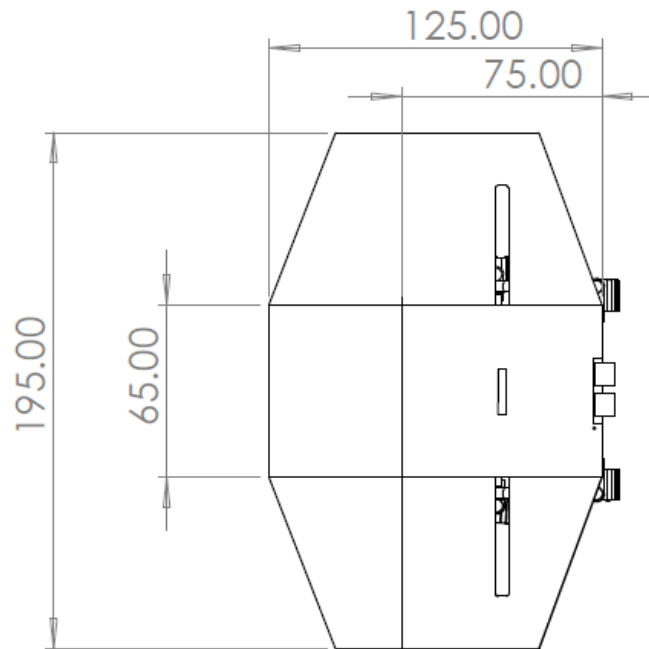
Dimensioned (mm) drawing of the Poli'ahu rover with solar panels in full extension.
